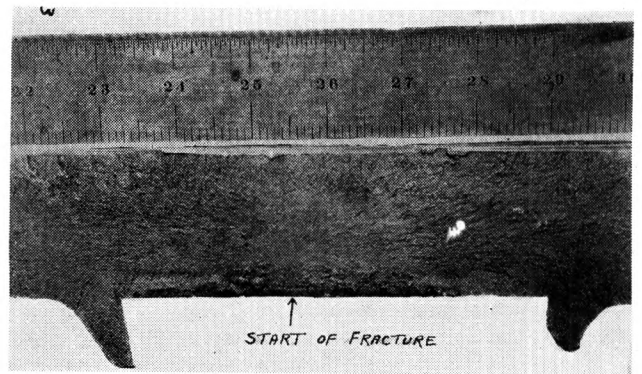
MIDDLE PORTION OF THE LOWER FRACTURED SURFACE OF THE MUZZLE
